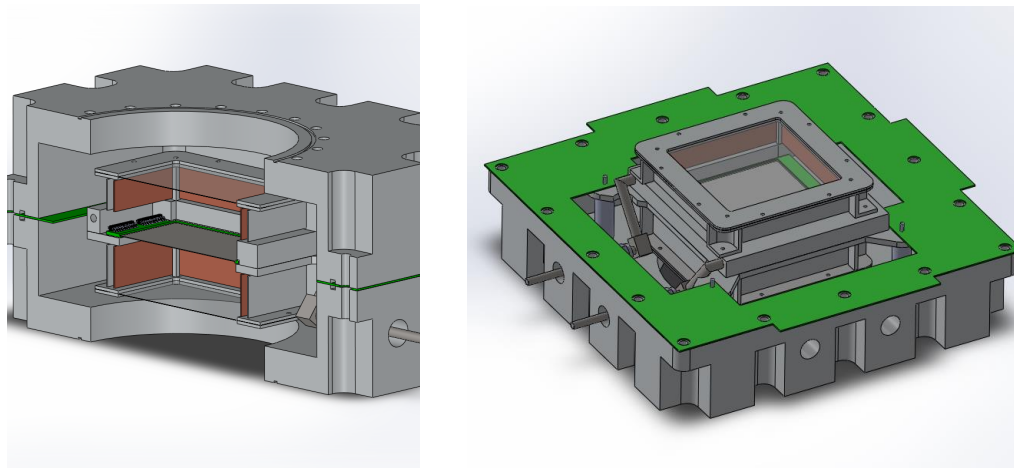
Technical drawing of the cooling system inside the chamber.
